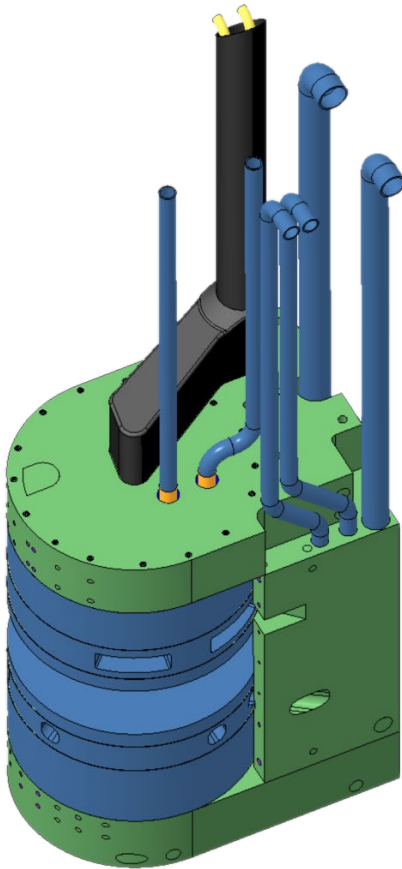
Water piping welded to the backbone water inlets/outlets.
